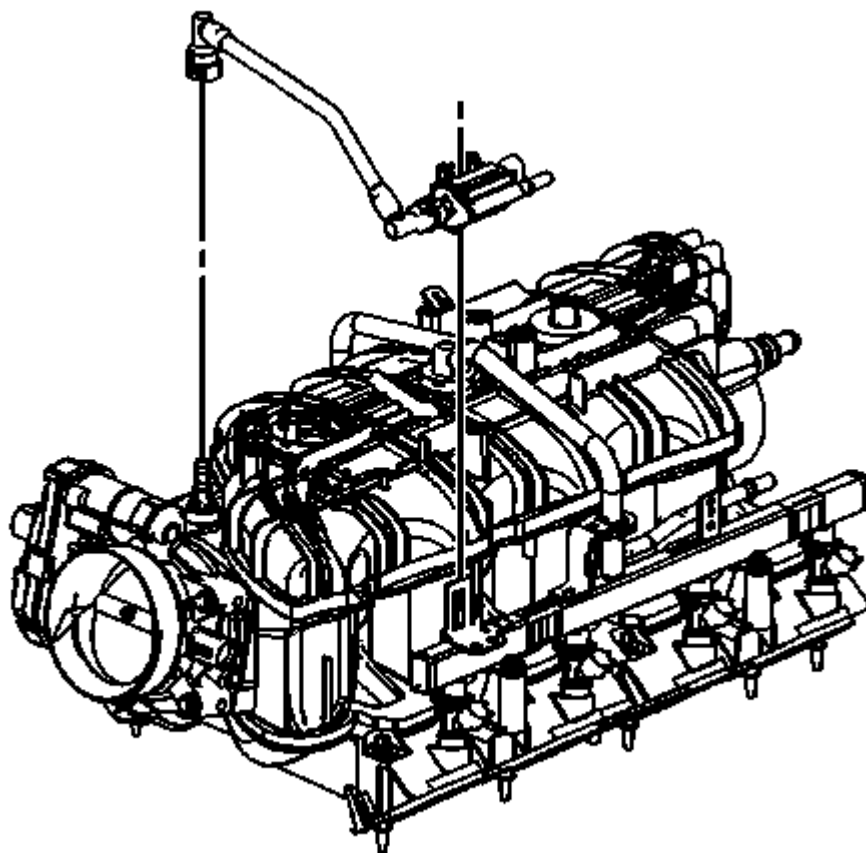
View Of Upper Intake Manifold Cover & Nut
